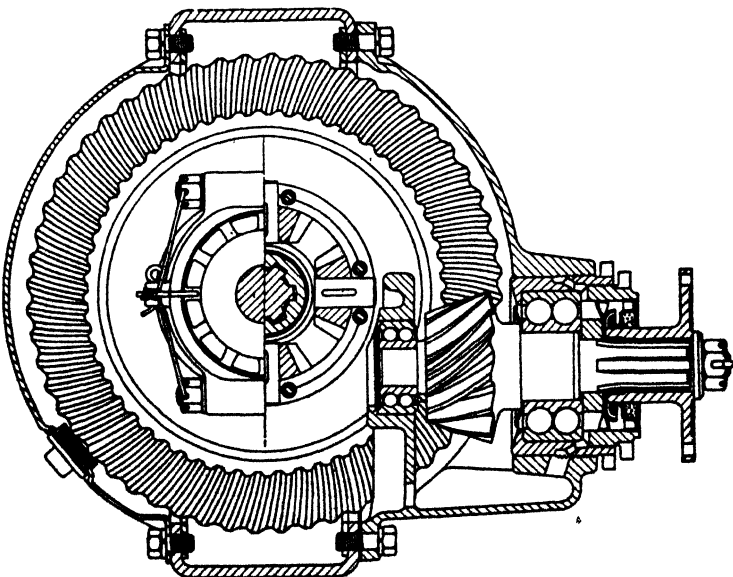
HYPOID-GEAR ASSEMBLY WITH STRADDLE MOUNTING.
